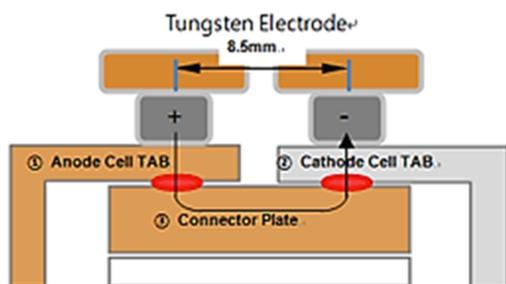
Schematic diagram of electrode for series spot welding.
